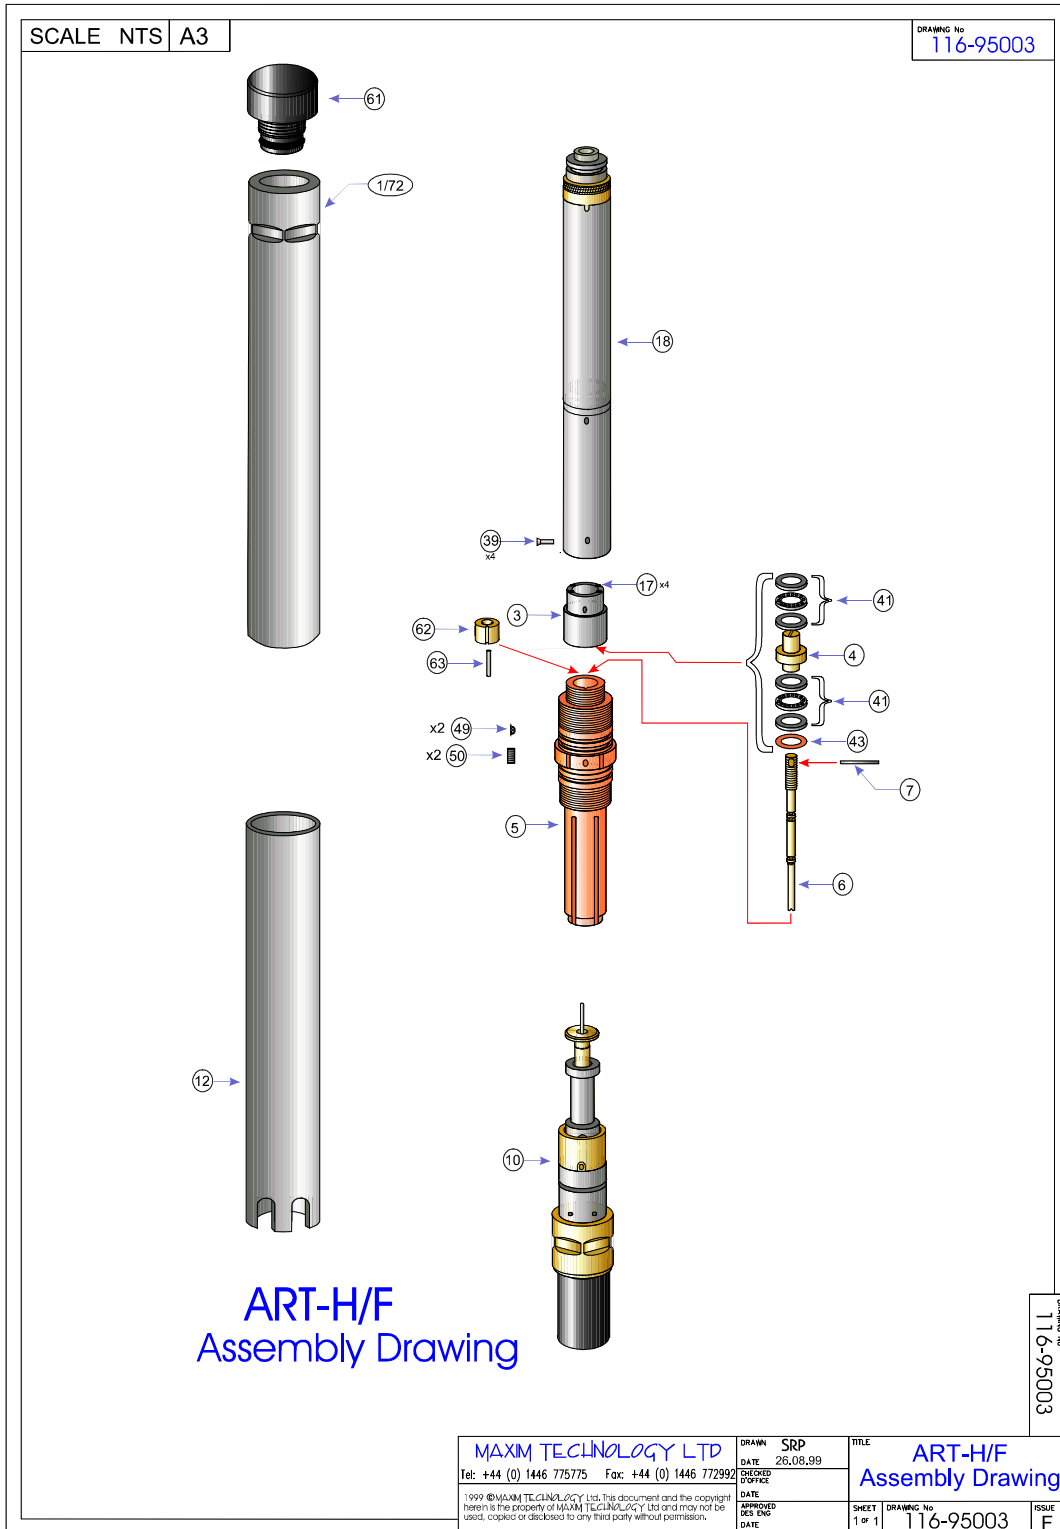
Exploded Assembly Drawing, ART-H - 116-95003-F
